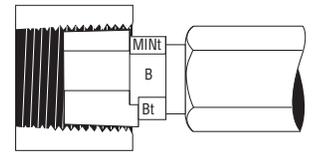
Checking minor diameter truncation with 6 step plain Plug Gages.
